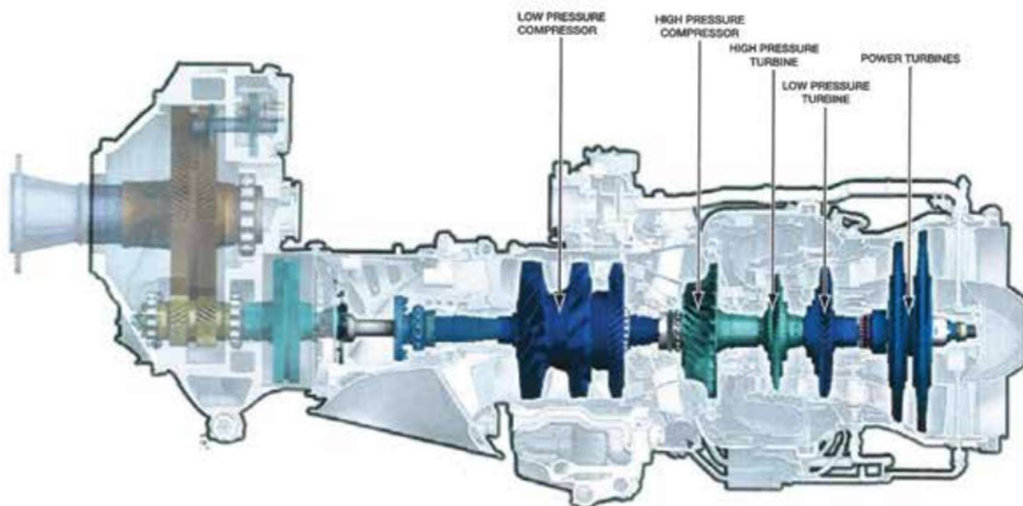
Major rotating assemblies in turbo-machinery and reduction gearbox
